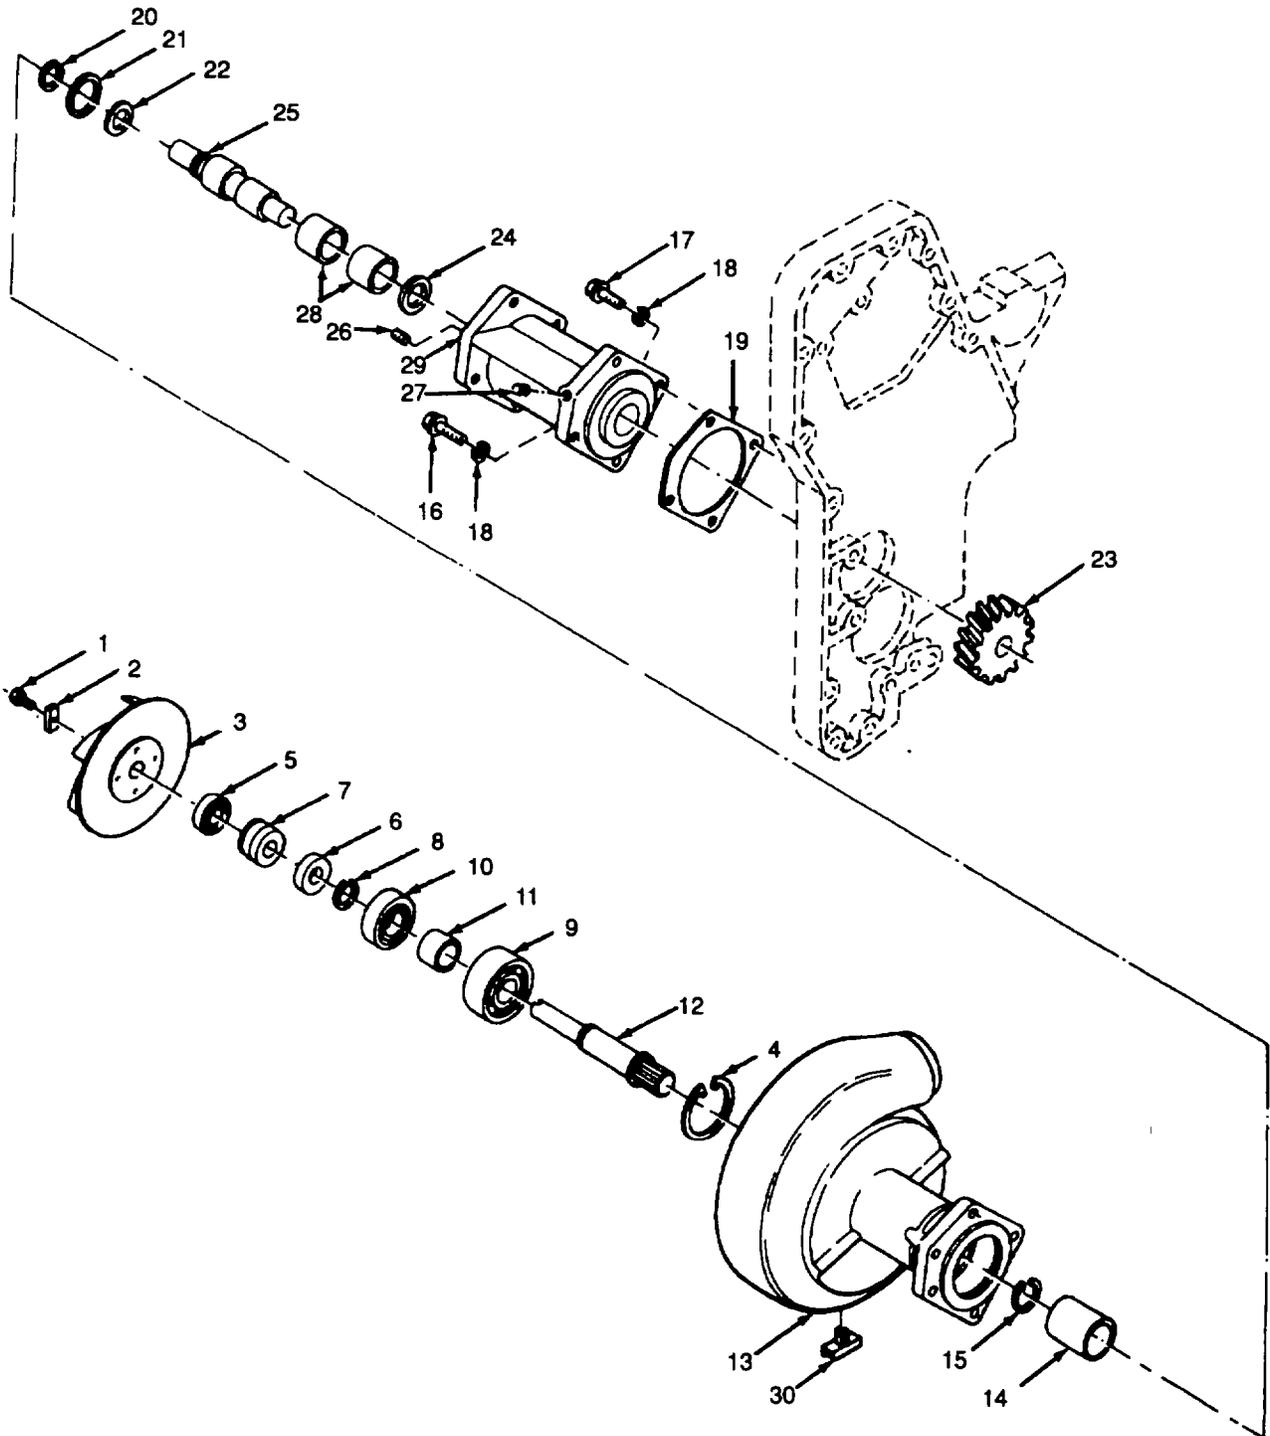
Water Pump and Water Pump Drive, Exploded View (Sheet 1 of 2)
